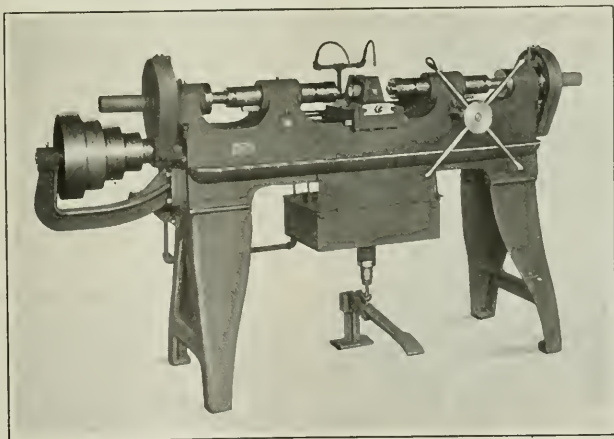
Nipple Reaming and Chamfering Machine made by the Murchey Machine & Tool Co.
